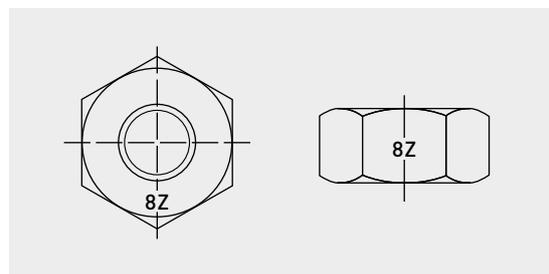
Example of the marking used on hot dip-galvanized nuts tapped oversize to tolerance position 6AZ after coating
